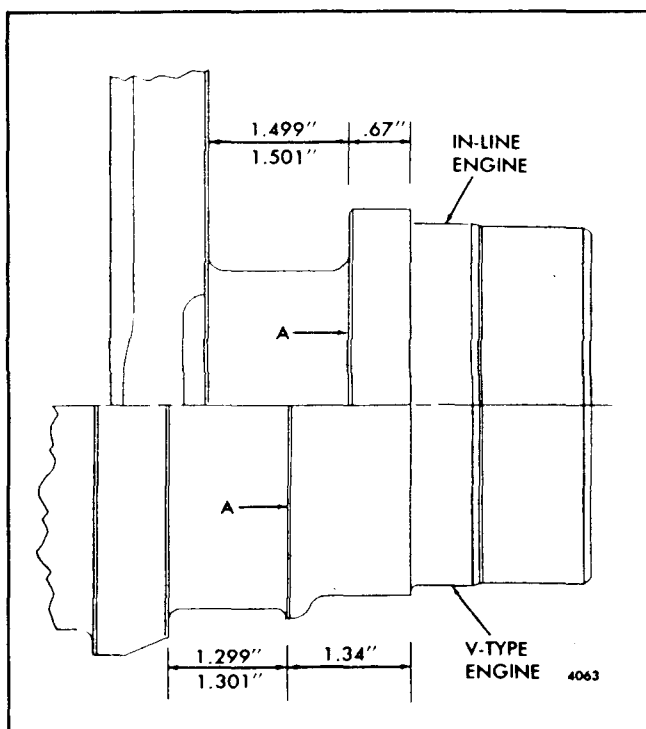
Standard Dimensions at Rear Main Bearing Thrust Washers-In-Line and V-Type Engines
